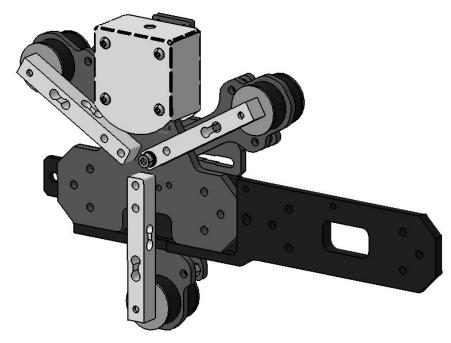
The coaxial back-to-back special mount completely inserted into the load measurement unit
